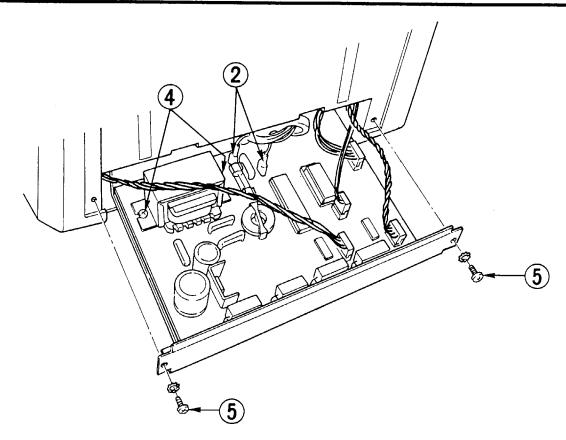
CIRCUIT BOARD REMOVAL
